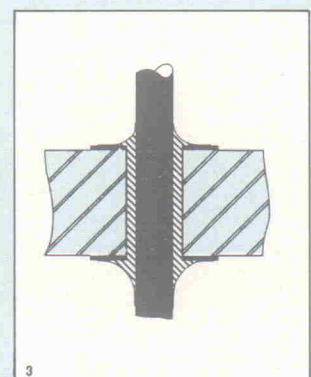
Cross-section of joint in plated-through hole with oversize pads. Note that this joint offers no increase in strength over that shown in Fig. 2, which has small pads.
